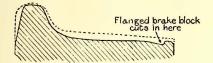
WHEEL CUT BY BRAKE-SHOE
